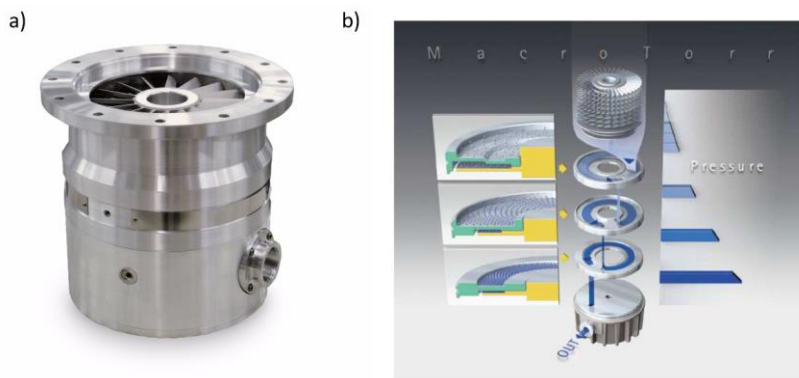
Turbomolecular pump and operation. a) turbomolecular pump [8]. b) exploded view of a turbomolecular pump. Also contains cartoon drawing of operation to help show the various stages of the stators in the turbo pump [8].
